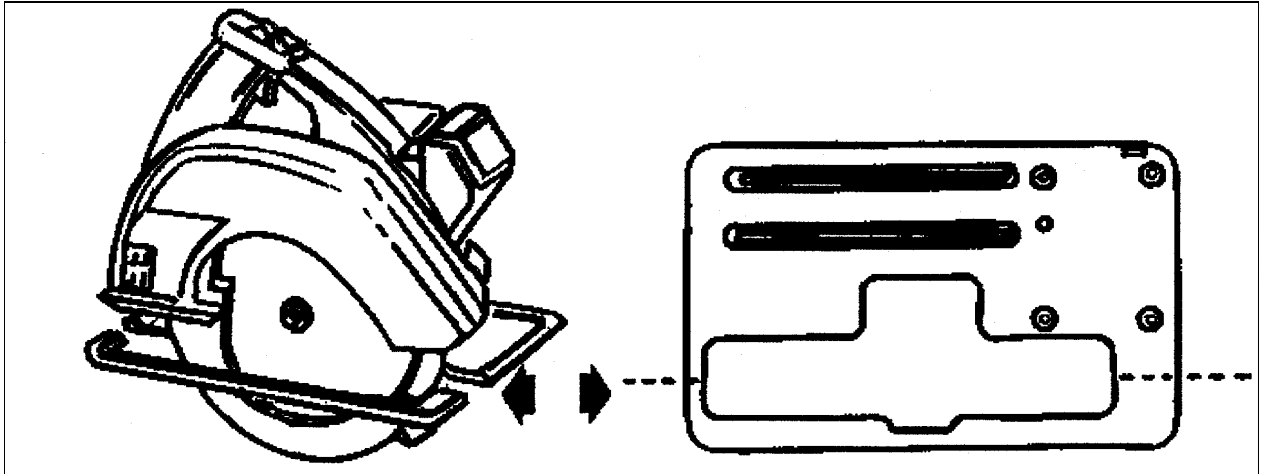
Builder's circular saw. Cut the foot assembly of the 10-1/4-inch circular saw as shown. File or grind the cut edges of the foot assembly to remove sharp edges.
